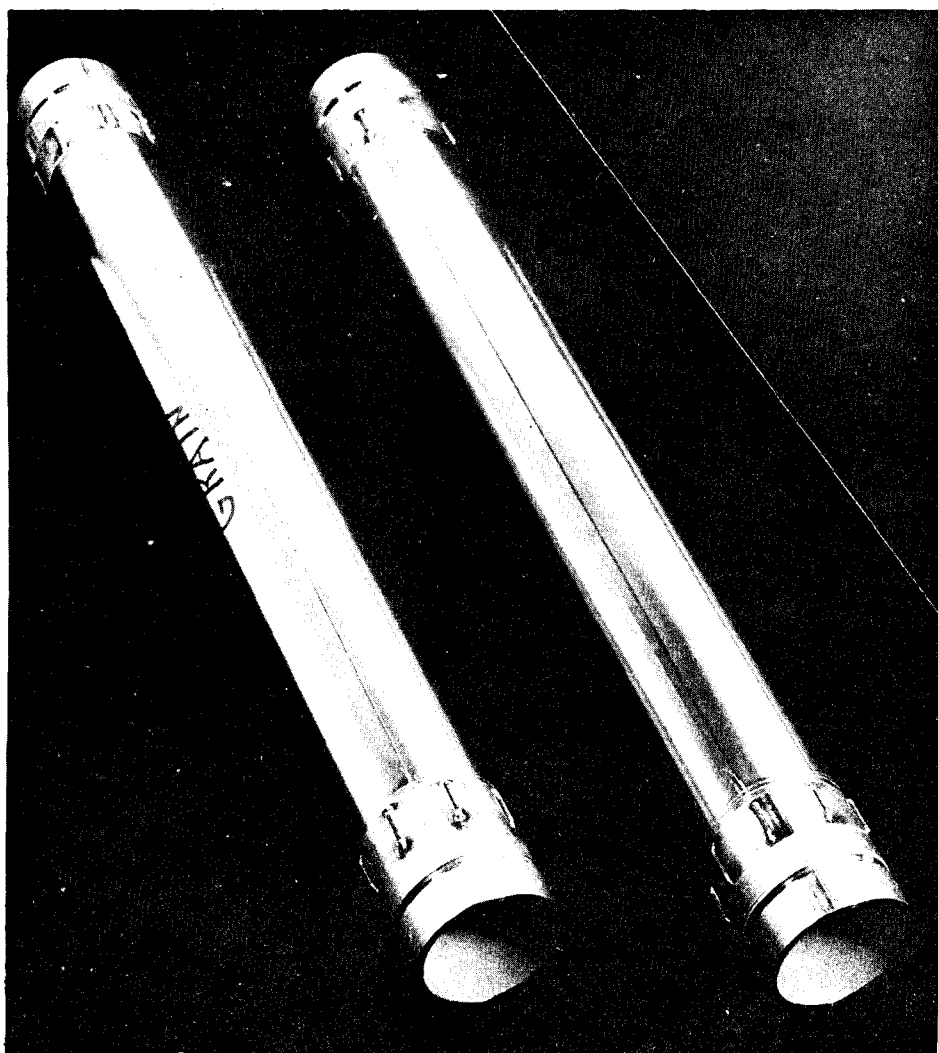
Peeled and Unpeeled Resistance Welded Liners
